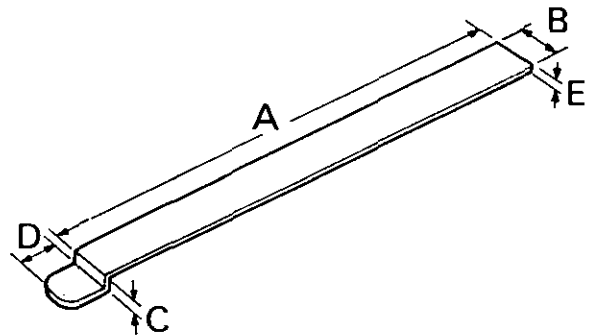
FEELER GAUGE — LAYCOCK CLUTCH
